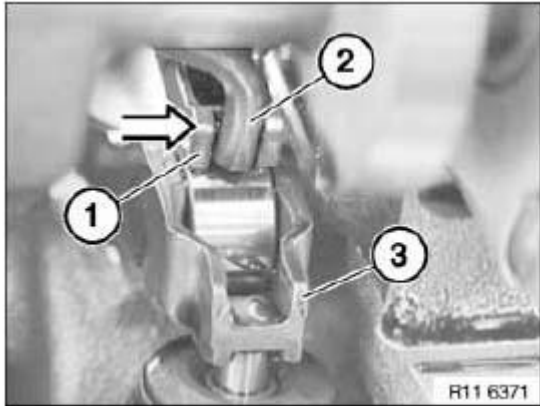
Identifying Roller Cam Follow, Return Spring And Intermediate Lever
